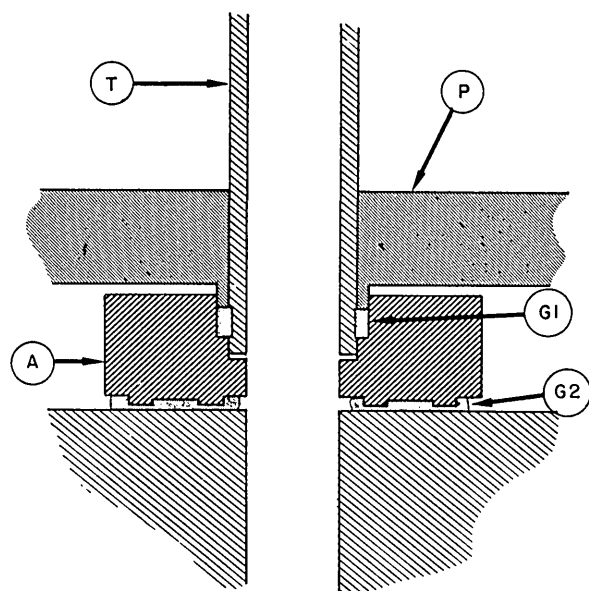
Details of two types of captured-elastomer seals used in the NBS/NIST manometer system. Ring A is fabricated with a land and groove on its bottom face and a compound receptacle for a locking seal on its top surface. Tube T is grooved to receive a polytrifluorochloroethylene gasket G1 which is then compressed by the force of a pusher P. The pusher also compresses polytetrafluoroethylene gasket G2. The total effect is to lock the tubing into a demountable assembly that both seals and locks it in place. (Reprinted from reference [10].)
